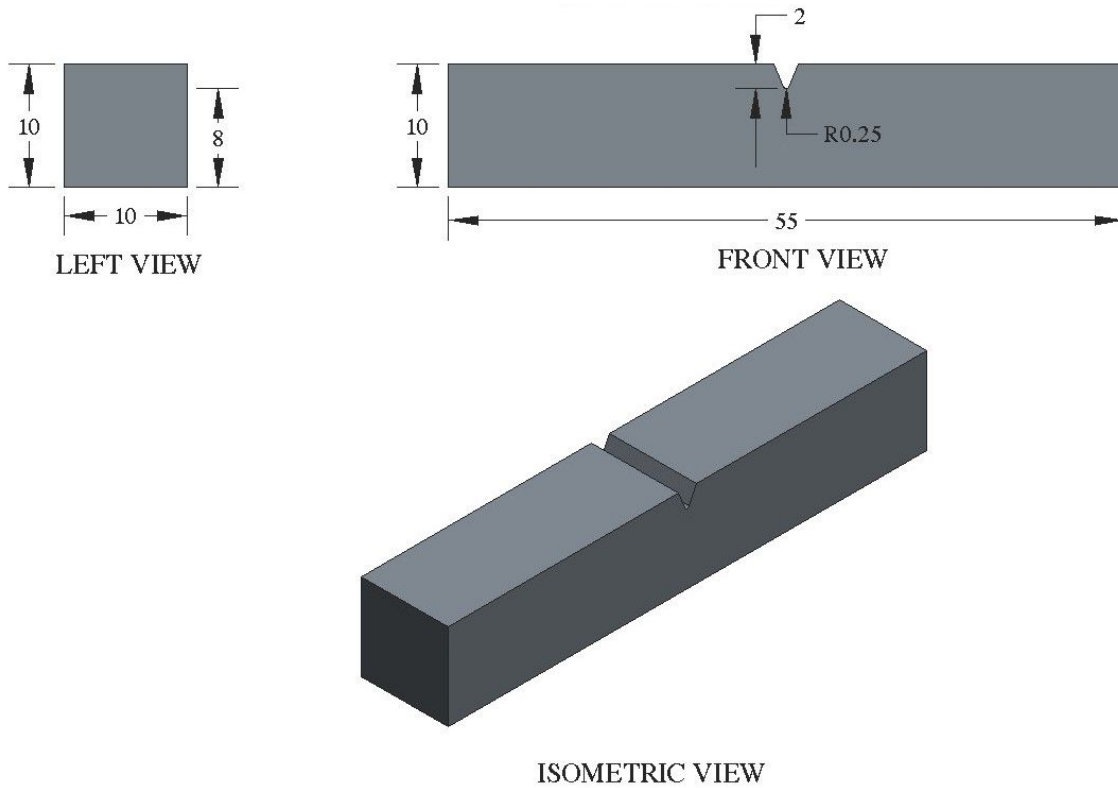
Typical dimensions and 3D rendering of specimen [13] (dimensions in mm).
